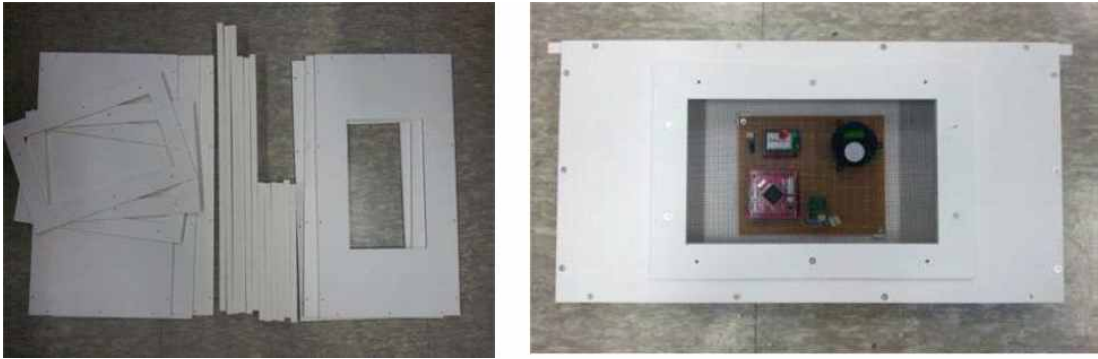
Processed Panel Material(Left), Assembled Sensor Board Panel(Right)
